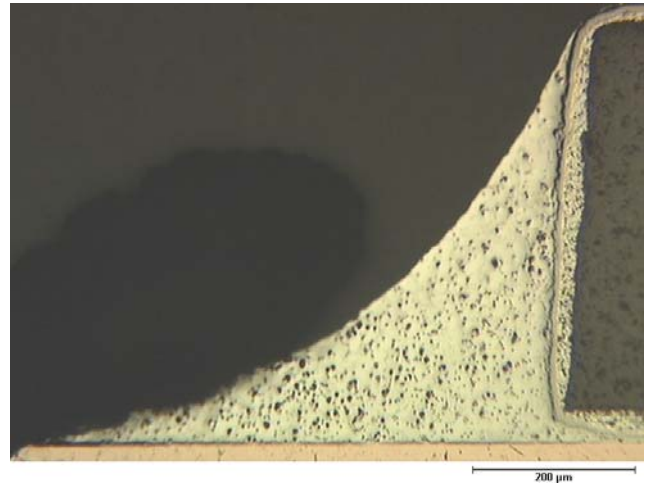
Cross section of a solder joint, chip resistor soldered with microwave power and a susceptors modified SnAgCu solder paste
